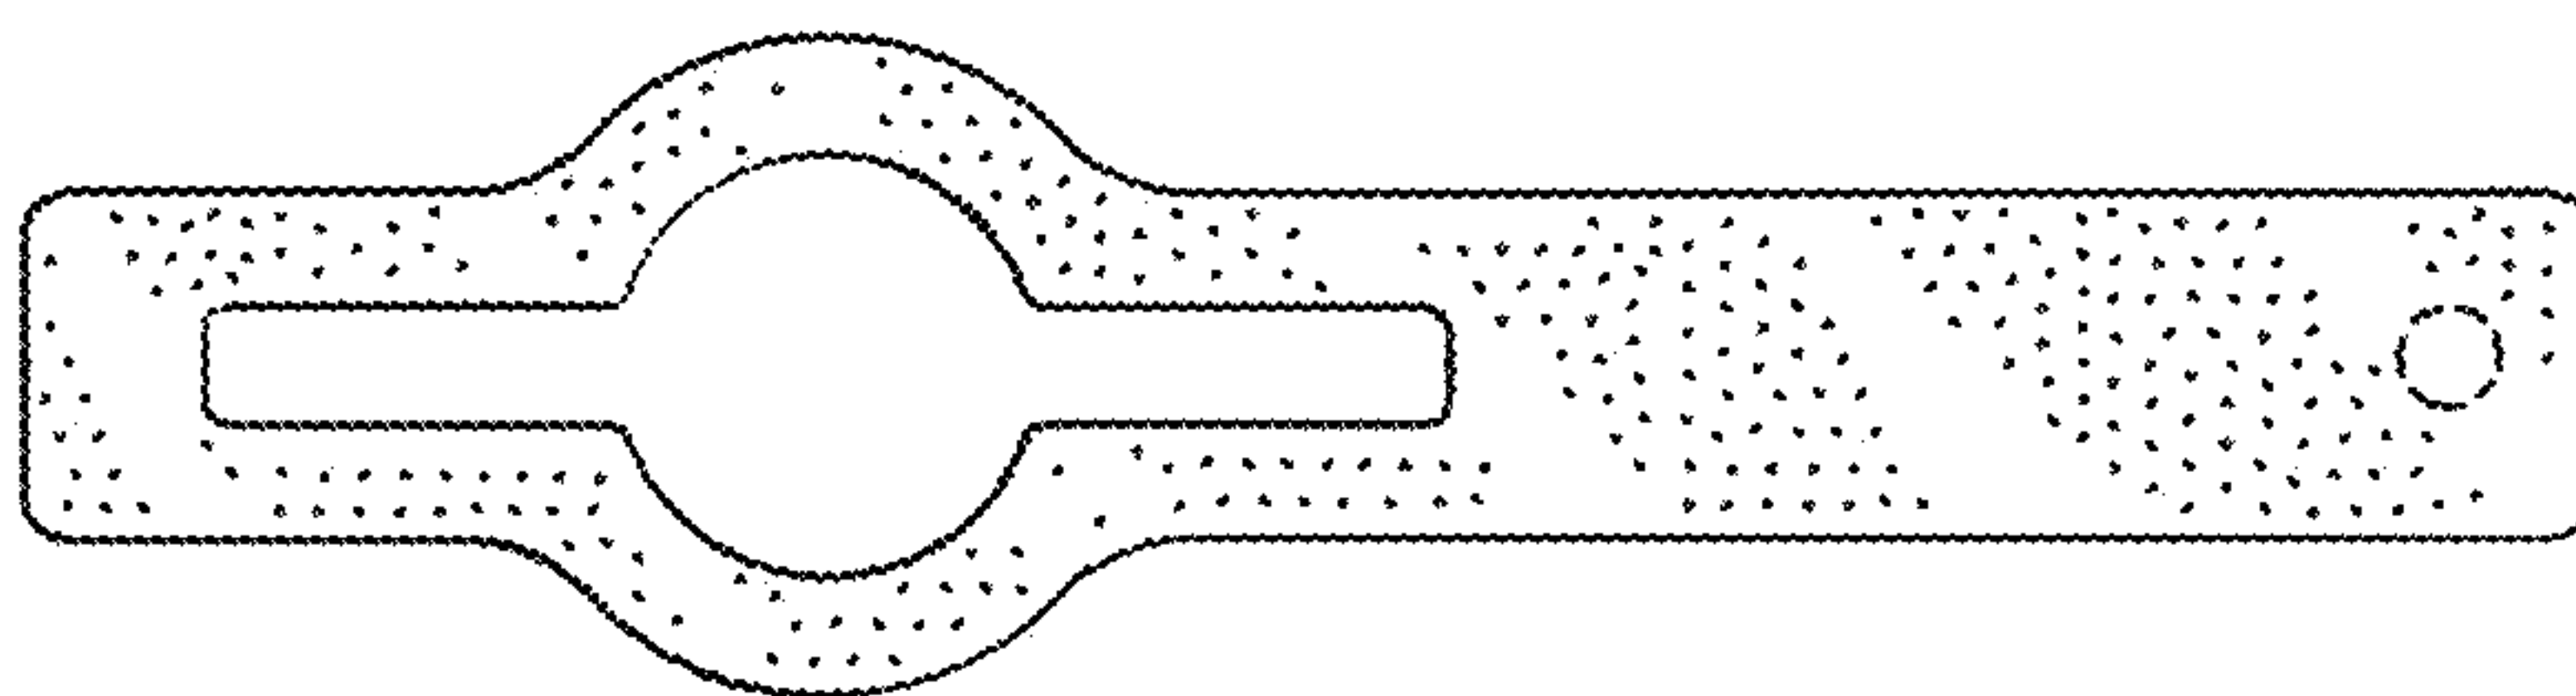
is a perspective view of a valve wrench according to my new design;
